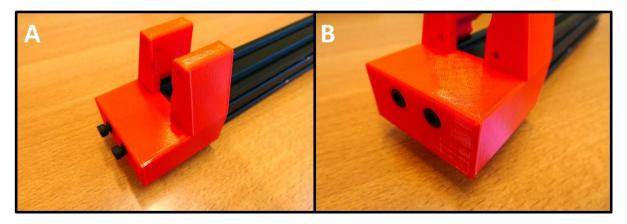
Installing the X X Motor End Mount. A) Fitting the mount on the rail. B) Fully installed.
